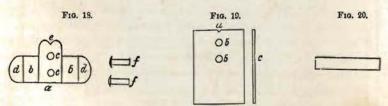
Slide, full size. a, back-piece; b, b, grooves; c, c, rivet-holes; d, d, handles; e, sight-notch; f, f, rivets.
